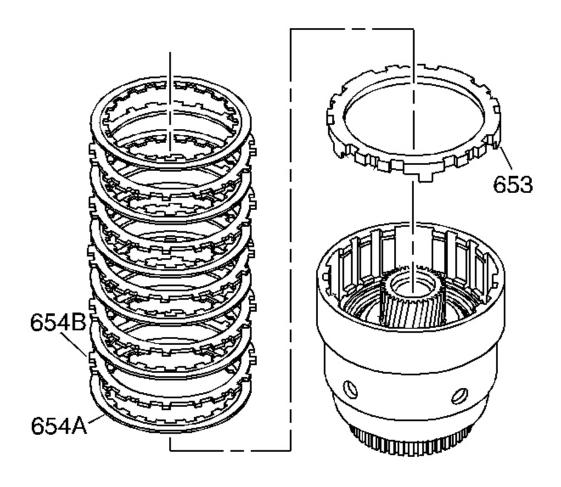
View Of Clutch Apply Plates & Input Housing Courtesy of GENERAL MOTORS CORP.
